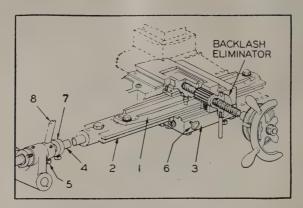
Detail of cross slide taper attachment for saddle type machine.
